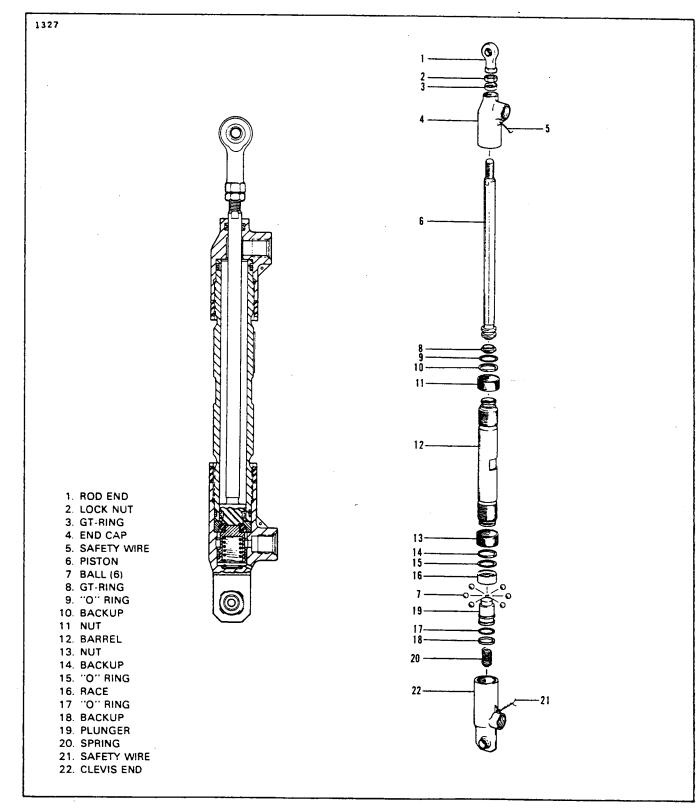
Gear Door Actuating Cylinder (Wiebel Tool)
